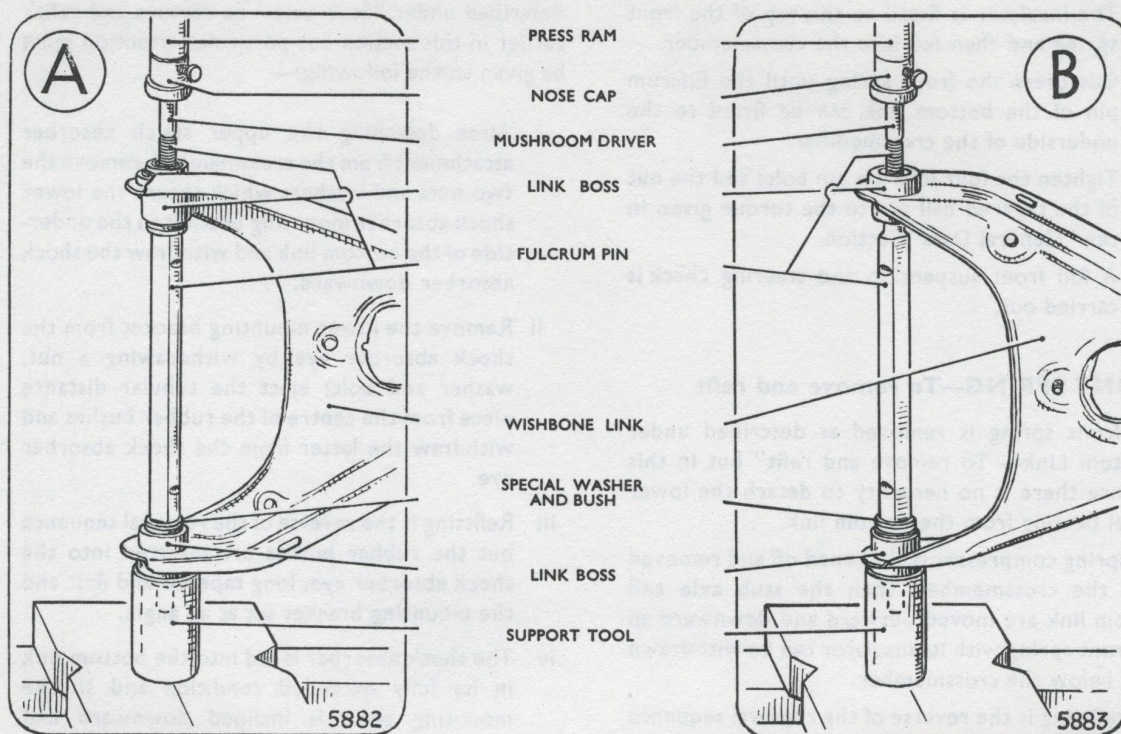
Illustrating method of removing bushes from the links in a workshop press using special tool RG. 318
